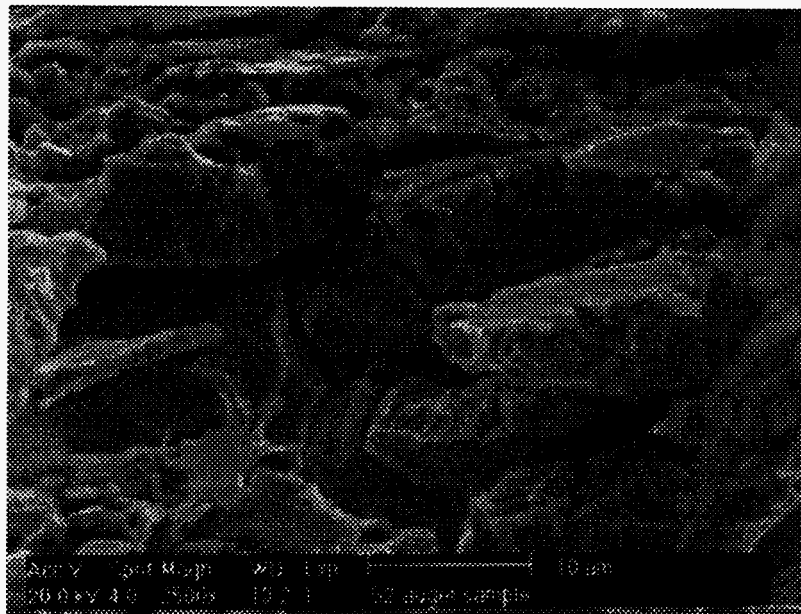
Surface of S2 steel Auger specimen showing brittle fracture in an area where the Zn coating was removed.
